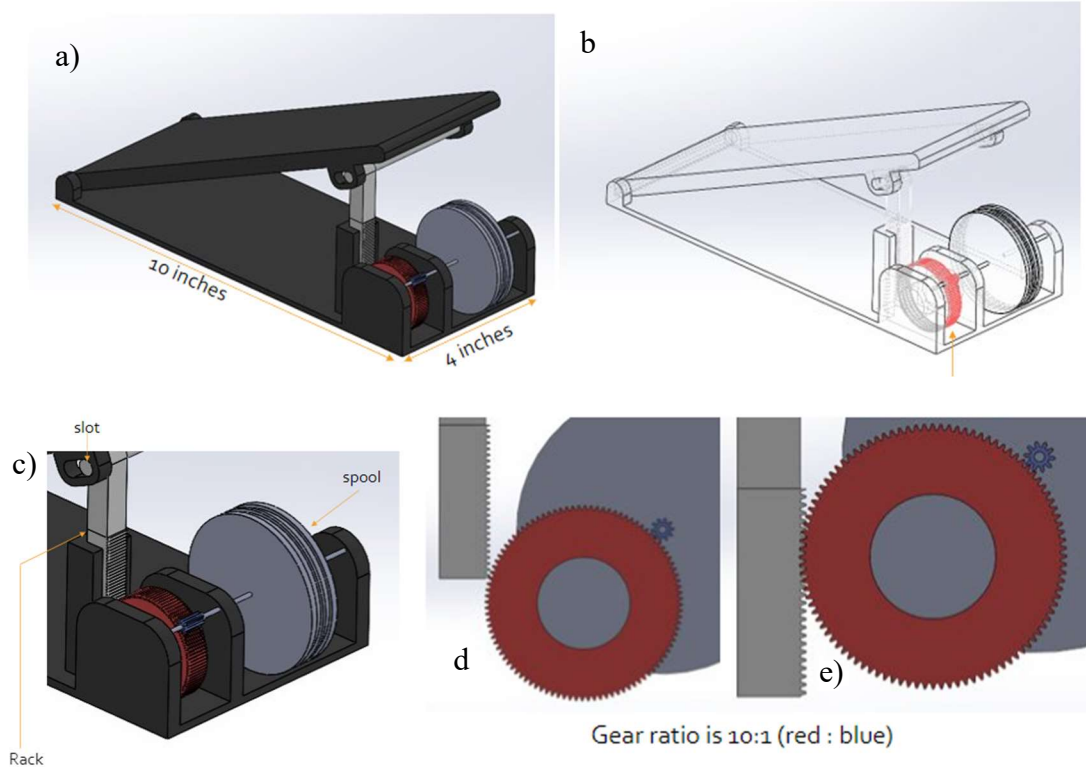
A) solid view of clip design 1 with dimensions and labels B) solid view of clip design 1 showing the pulley and wire
